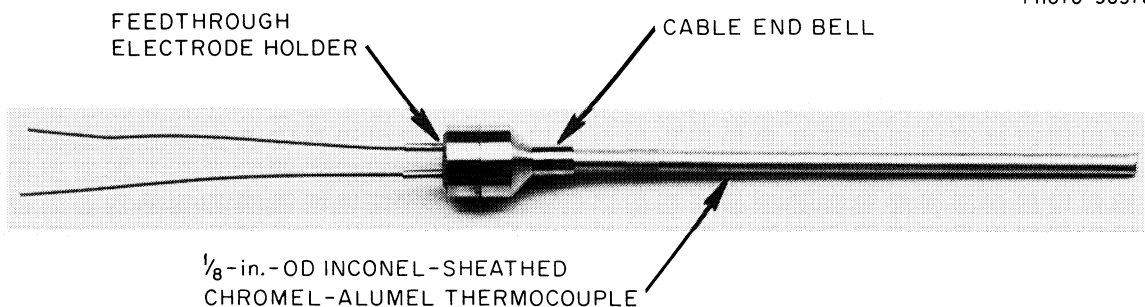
End Seal for  $\frac{1}{8}$ -in.-OD Sheathed Thermocouple with End Bell Assembled.
